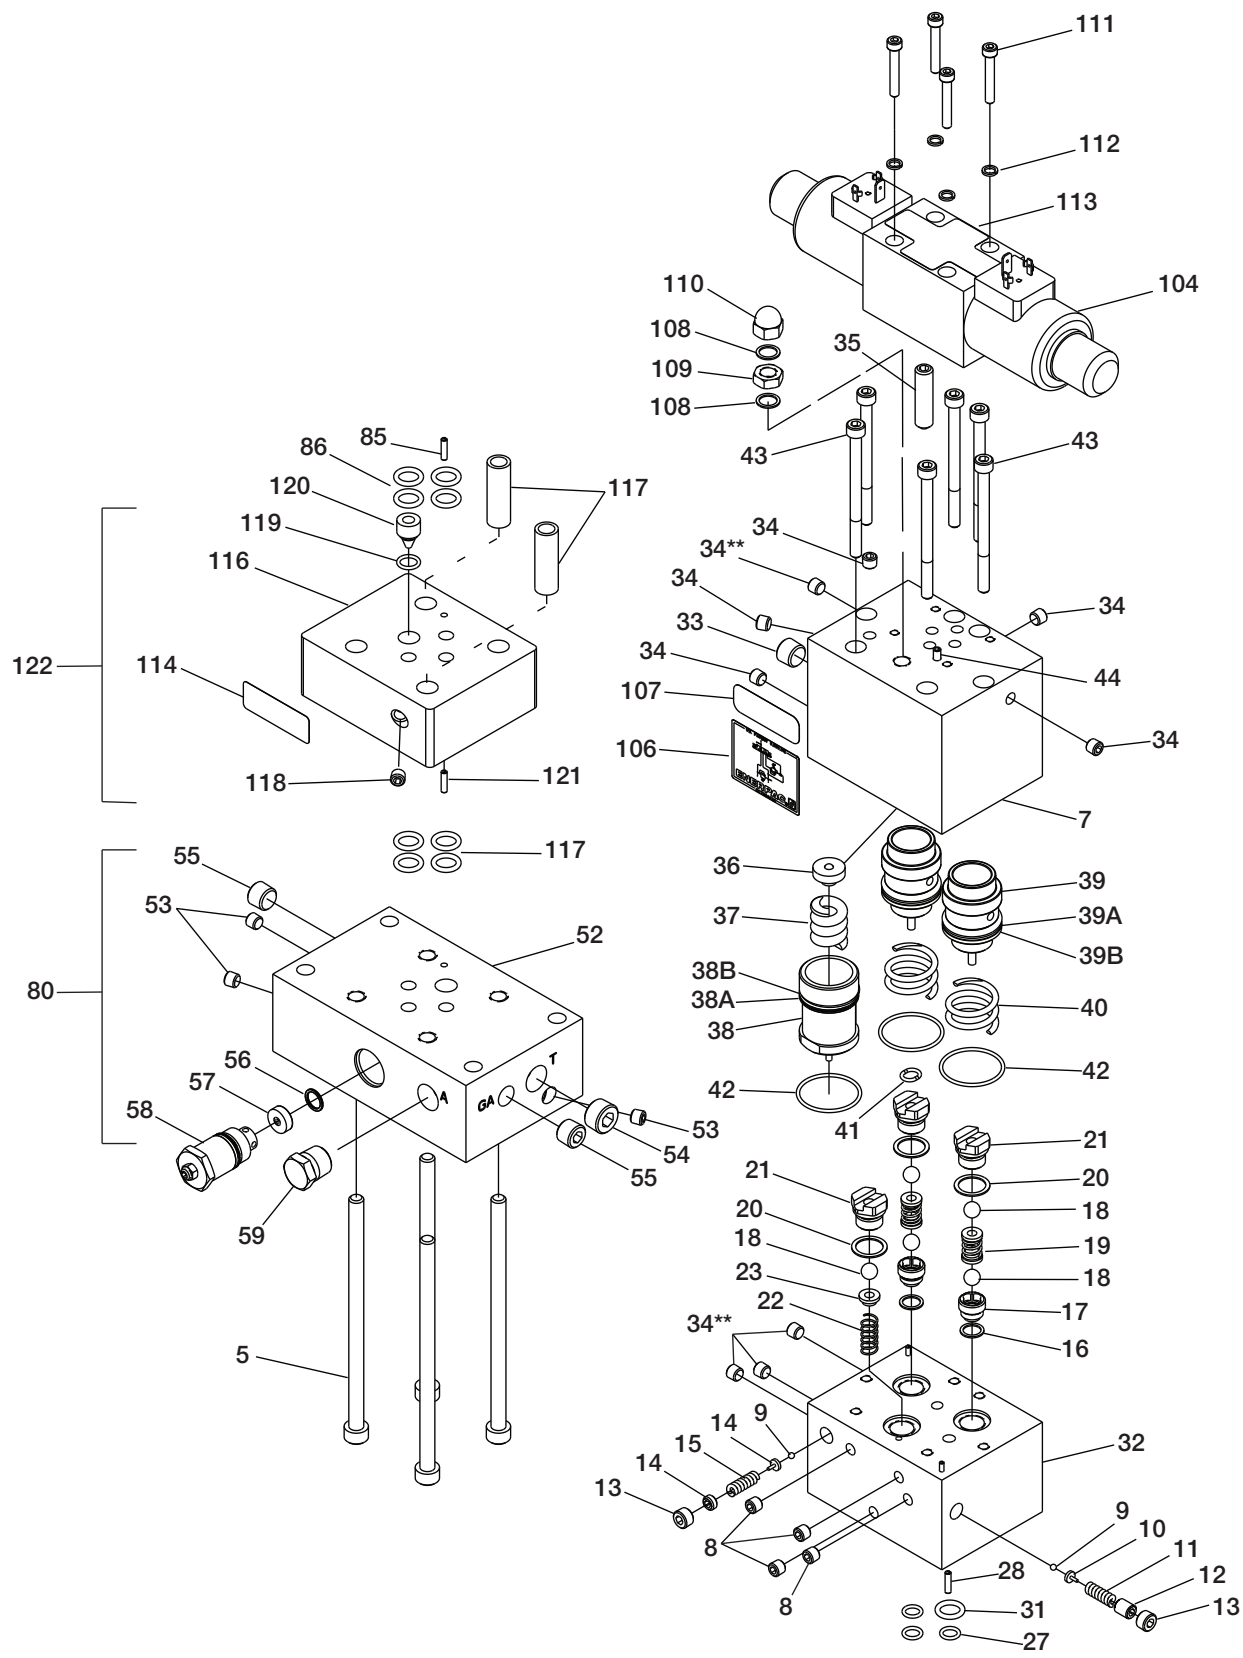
, Electrically-Operated, Vacuum Assisted Control Valve Assembly, VE33VAC
